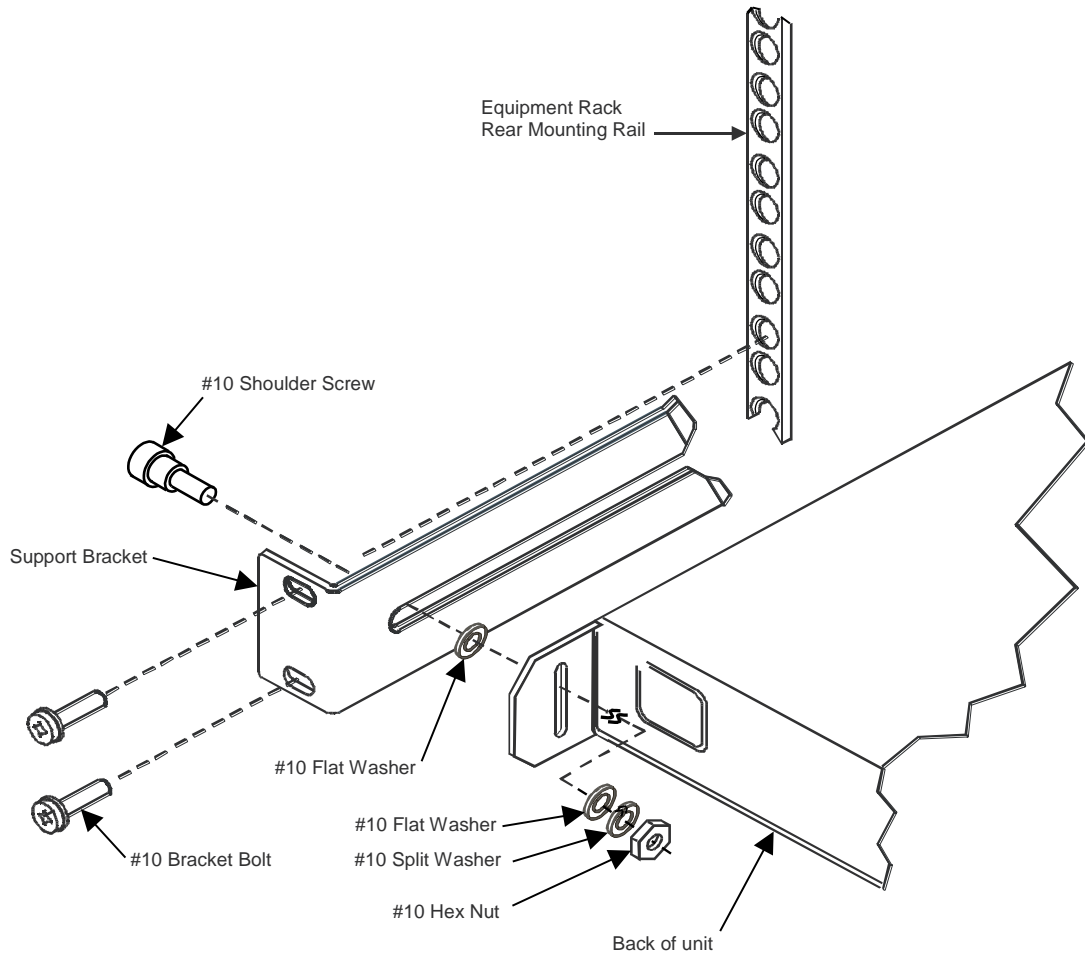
Installation of the Optional Rear-Mounting Support Brackets
